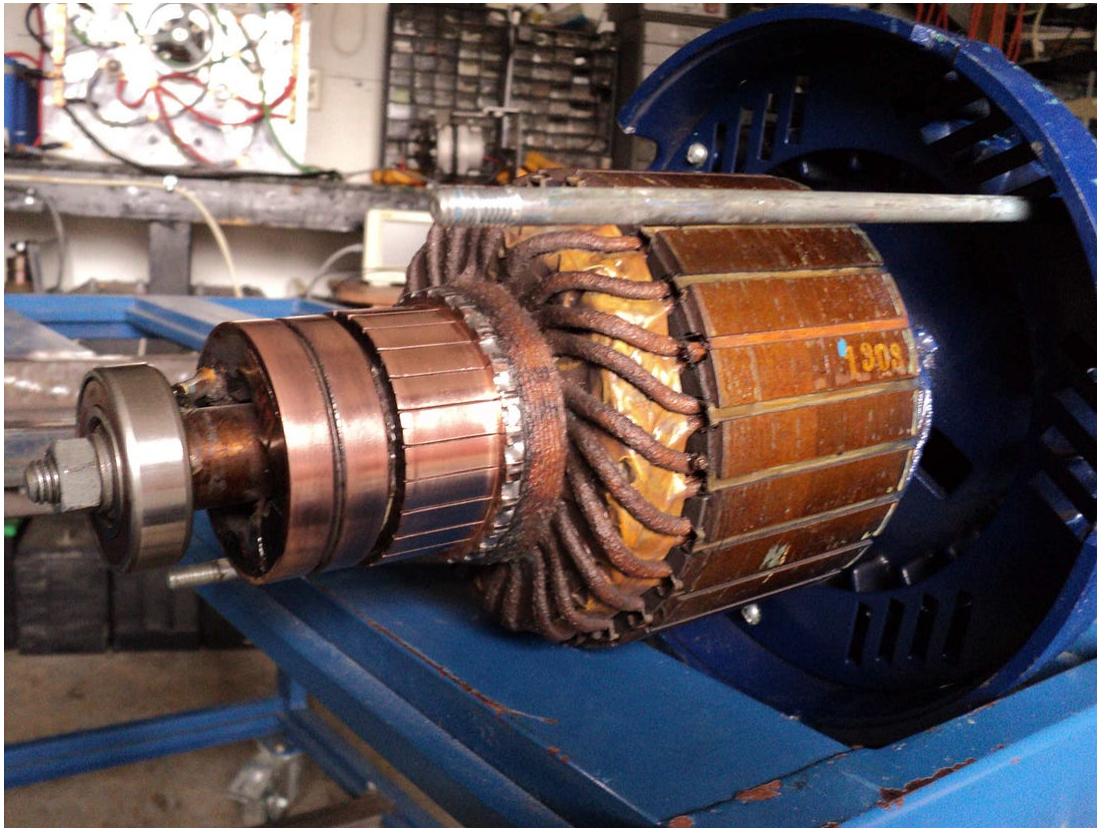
The Alexander motor/generator test prototype.
